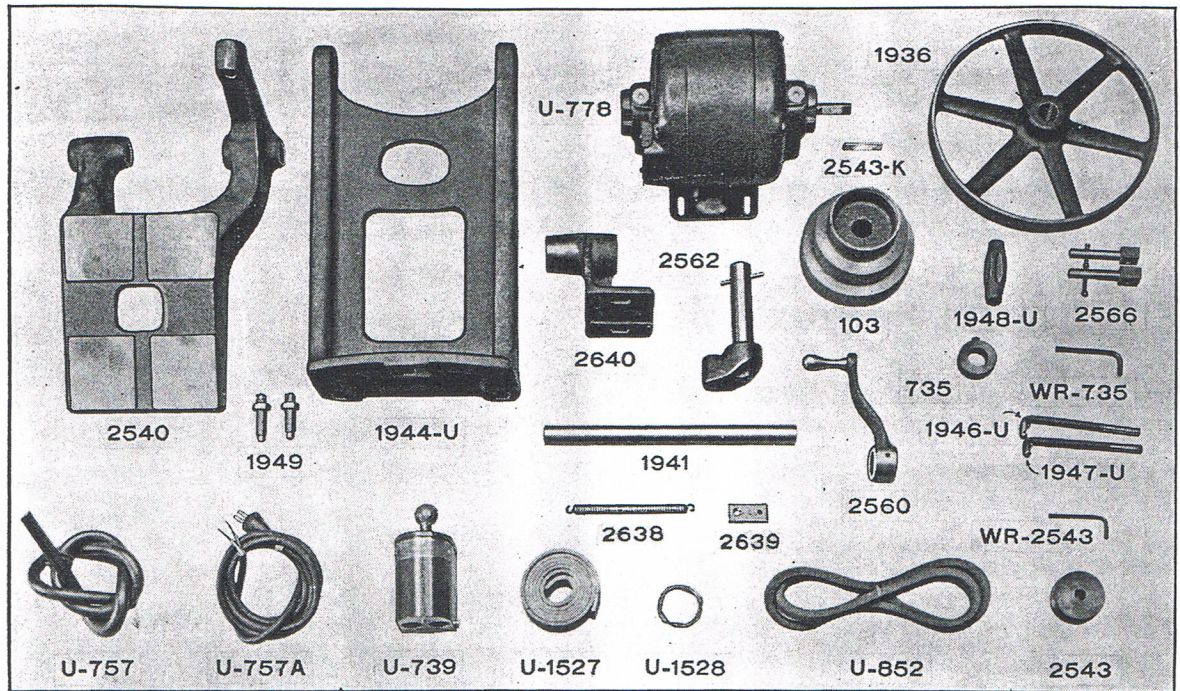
Underneath Motor Drive Parts for 9-inch "Workshop" Lathes—Models B, and C.
